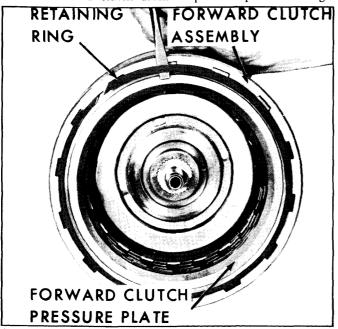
Removing Forward Clutch Retaining Ring and Pressure Plate
